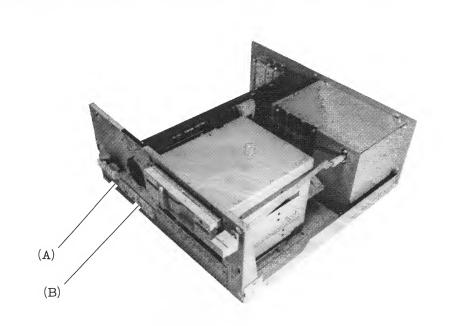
POWER-ON LED ASSEMBLY REMOVAL/REPLACEMENT
